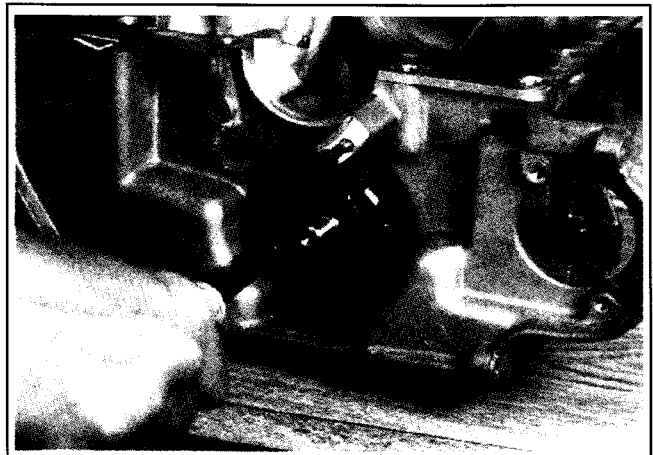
Securing Oil Pump Cover to Crankcase.
